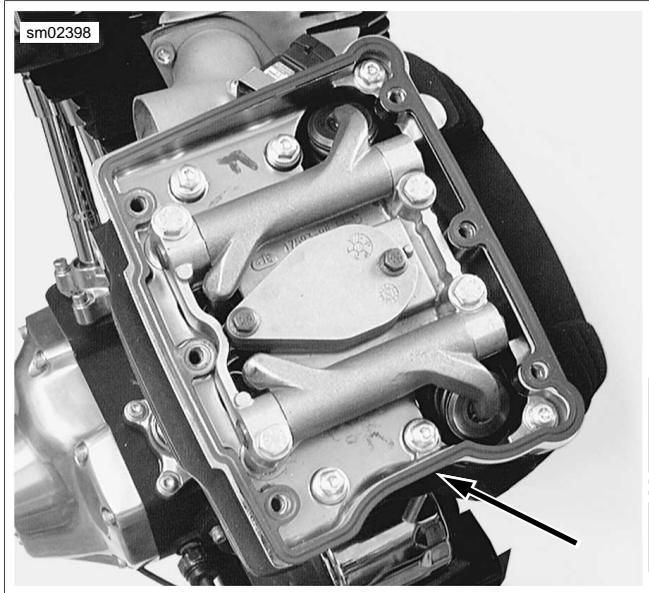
Rocker Cover Gasket Indent (Front Cylinder Shown)
